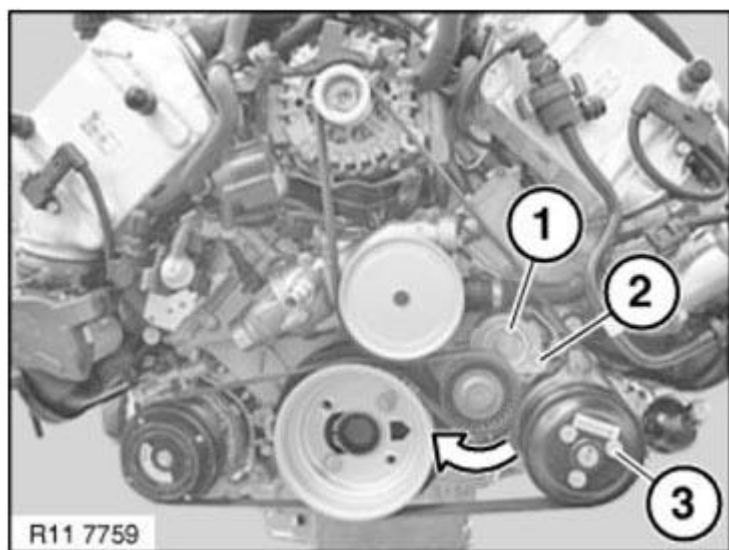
Identifying Belt Tensioner Tensioning Direction
